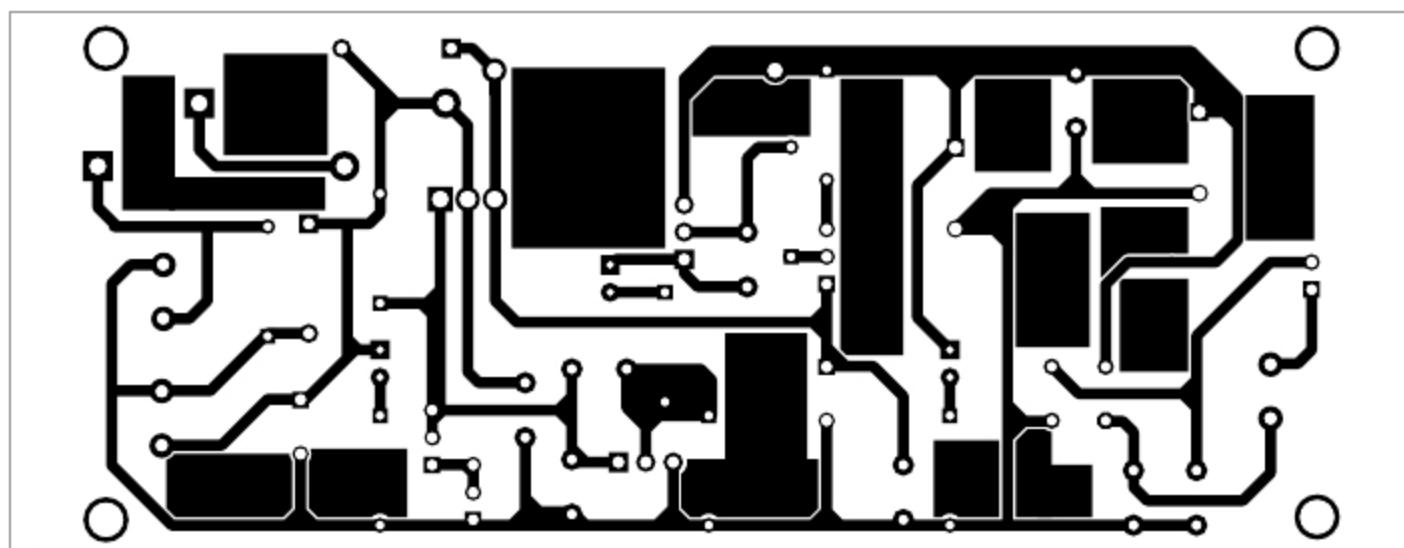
Actual-size PCB layout of the simple voltage adjustable power supply
